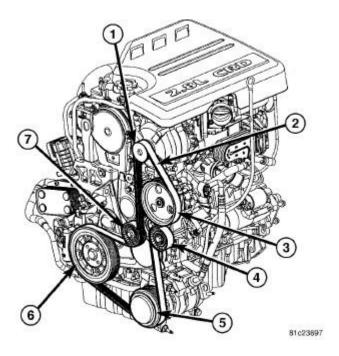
Power Steering Pump - 2.8L Diesel Courtesy of CHRYSLER LLC
